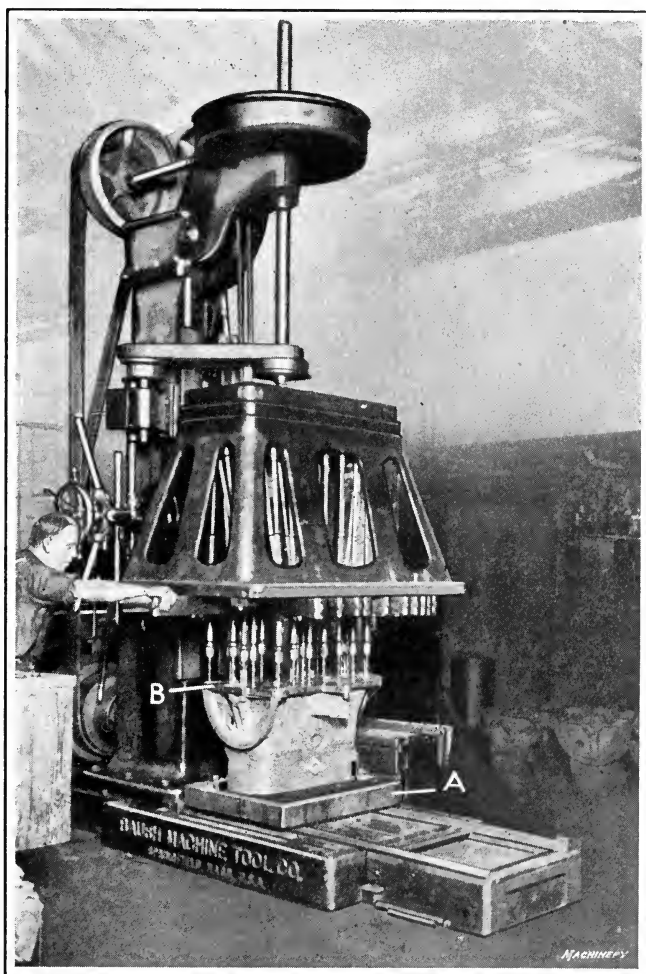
Multiple-spindle Drilling Machine equipped with Sliding Fixture to Facilitate Loading Casting in Fixture and Removing Drilled Work
